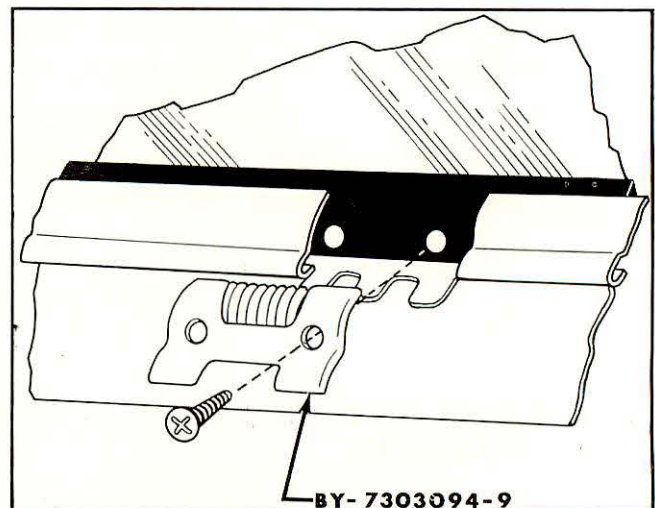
WINDSHIELD BELT MOULDING JOINT COVER
